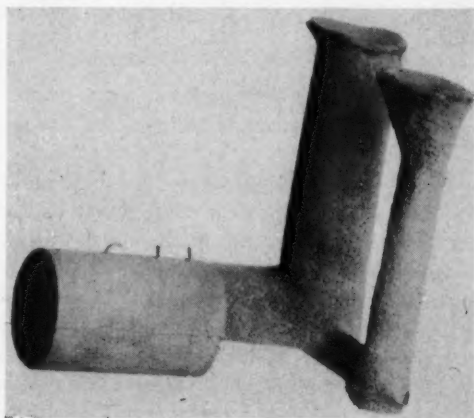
HYDRAULIC AND FRACTURE TEST CASTING.
